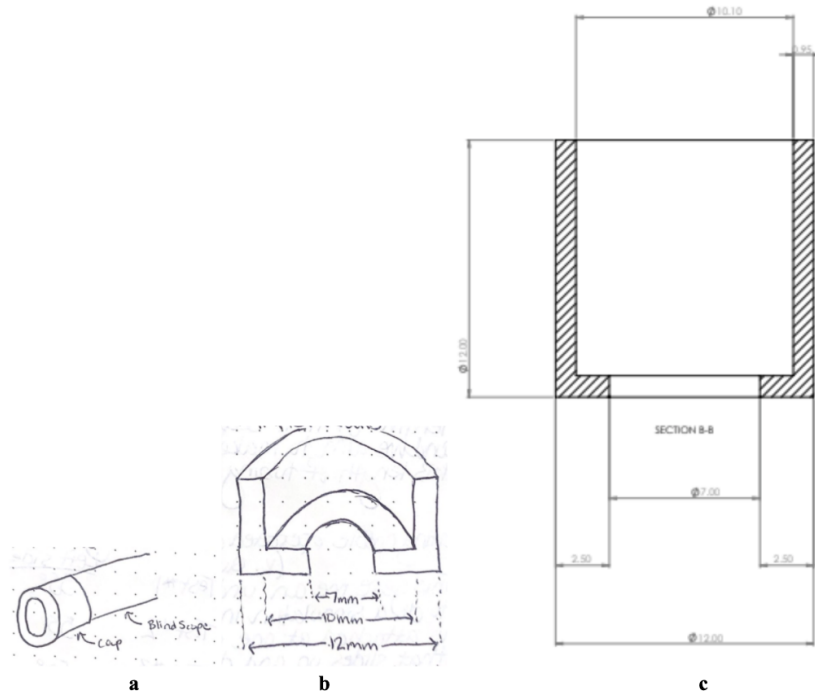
Sketches of the distal end cap for the Blind Scope with dimensions; (a) is a side view of the cap on the distal end of the Blind Scope, (b) is a cross-sectional view of the cap to get a view of the cut-out interior; (c) is a SolidWorks drawing with dimensions in mm of the cap.
